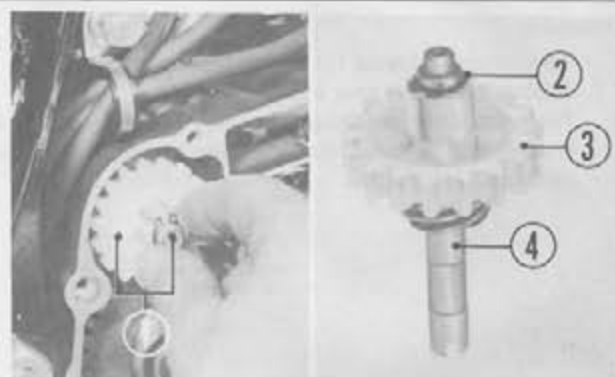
① Tachometer drive shaft and oil pump drive gear
